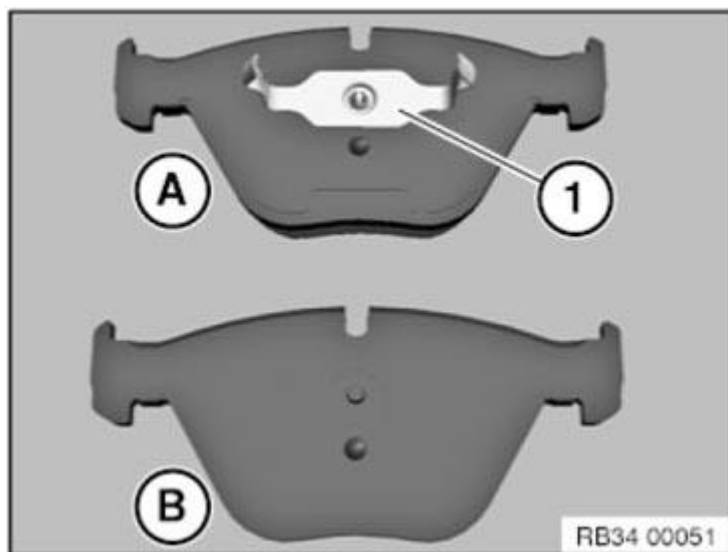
Identifying Brake Pads With/Without Retaining Spring
